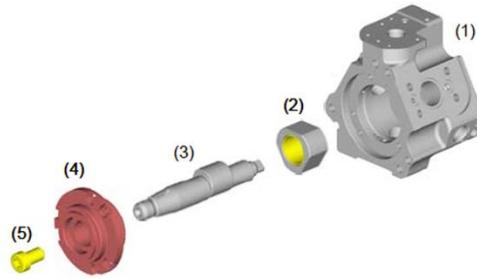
Body and components to be assembled. Pump body (1); polygonal ring (2); eccentric shaft (3); flange (4); screw (5)
